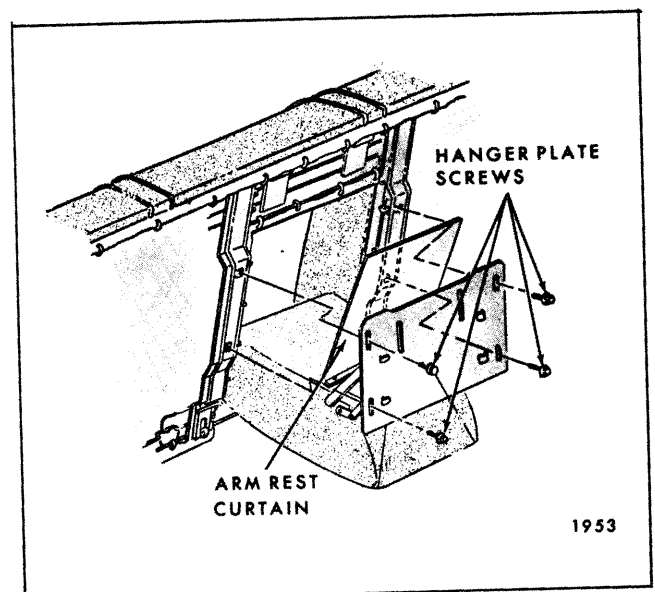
Rear Seat Back Arm Rest and Hanger Plate
